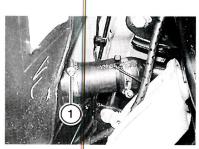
Remove expansion rivets (1). Release screws (2) and lower fuel tank a
